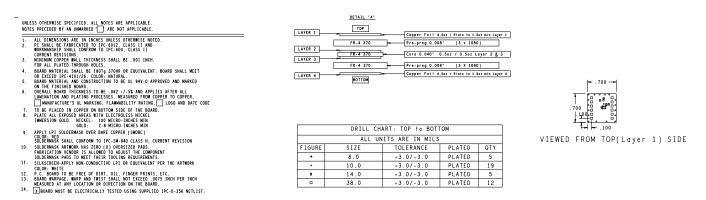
SMP-TPS61201-MVK Fabrication Drawing
